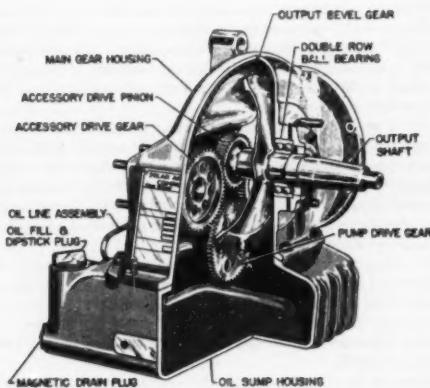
CUTAWAY VIEW OF MAIN REDUCTION GEAR AND ACCESSORY DRIVE
